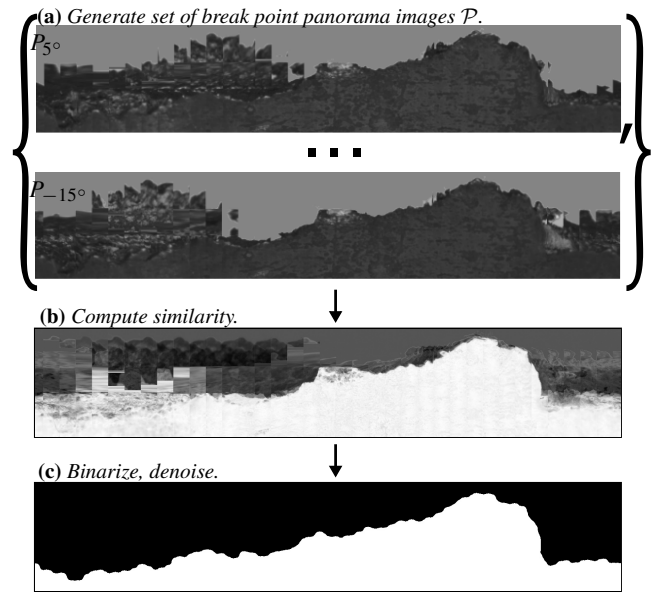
Steps involved in extracting break point edge of a broken specimen part.
